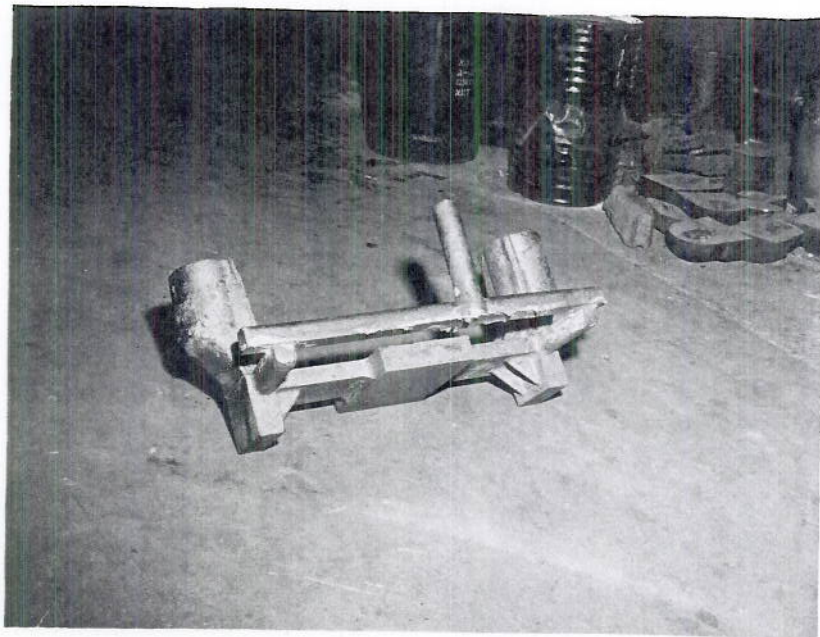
CASTING OF FIG. 18 RISERED TO PRODUCE SHRINKAGE TEARS.
